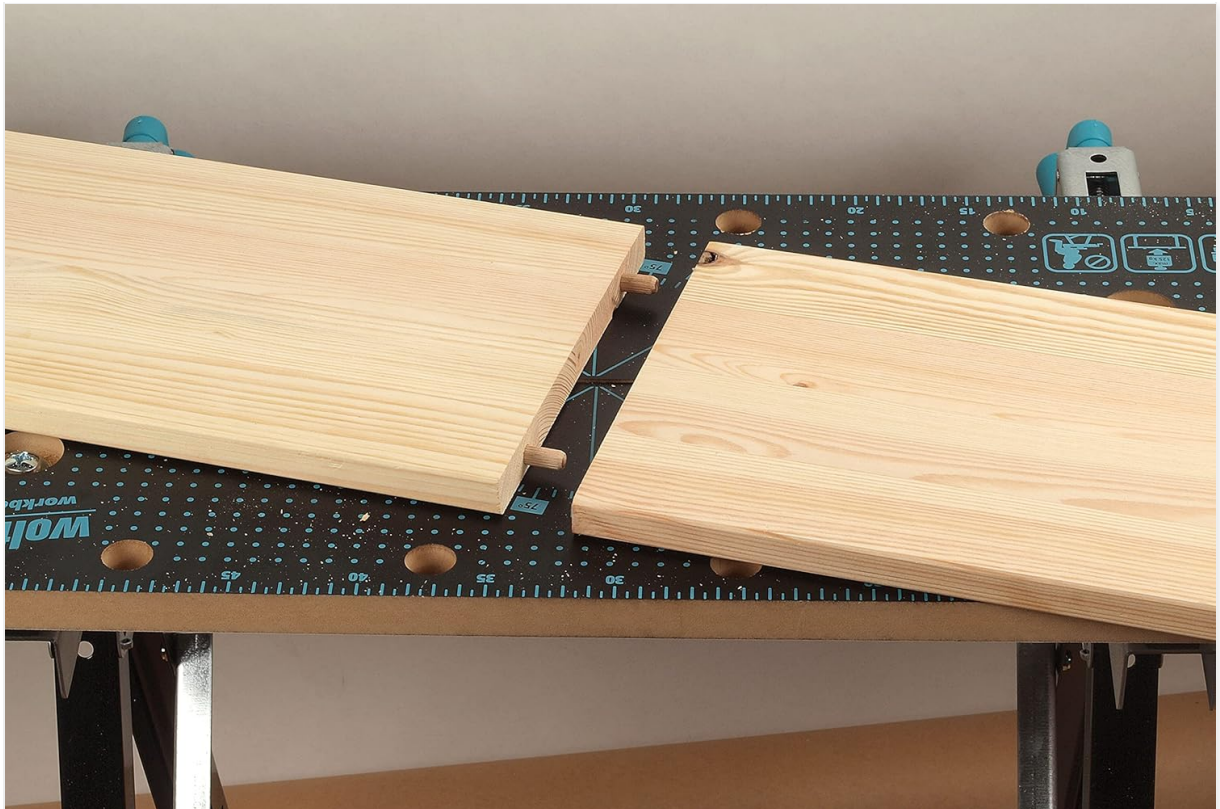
Two wooden boards ready for an edge-to-edge connection, with dowel pins in one piece and matching holes in the other.
